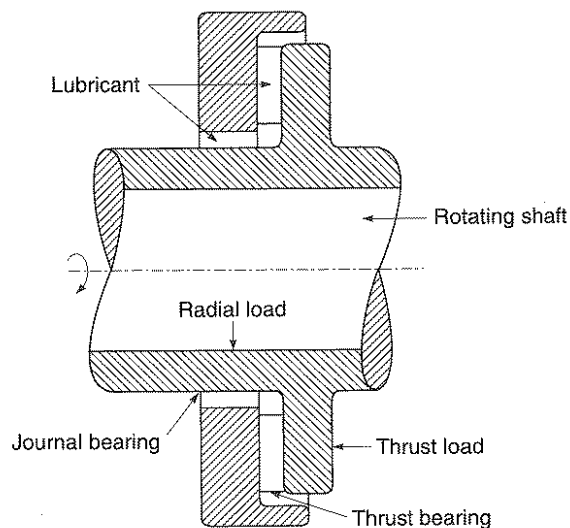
Schematic of rotating shaft supported by journal bearing and thrust bearing (Adapted from Bhushan (1999)).
